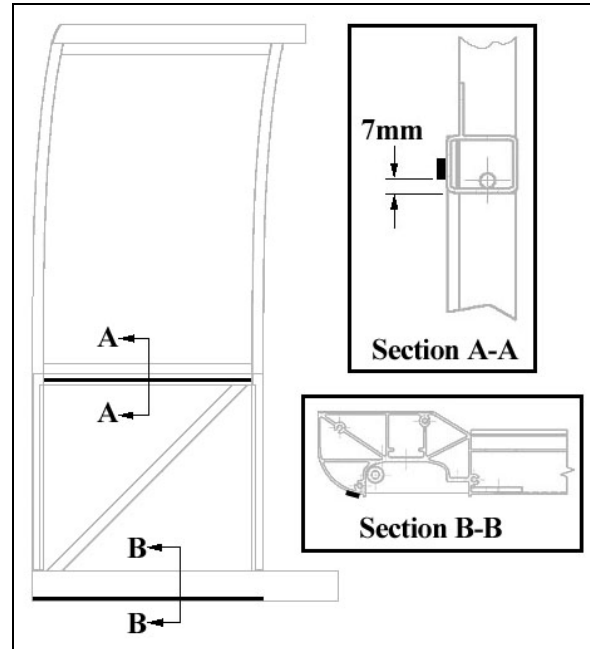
SIDE PANEL INSTALLATION – DOUBLE FACE ADHESIVE TAPE APPLICATION ON THE SLIDE-OUT STRUCTURE
